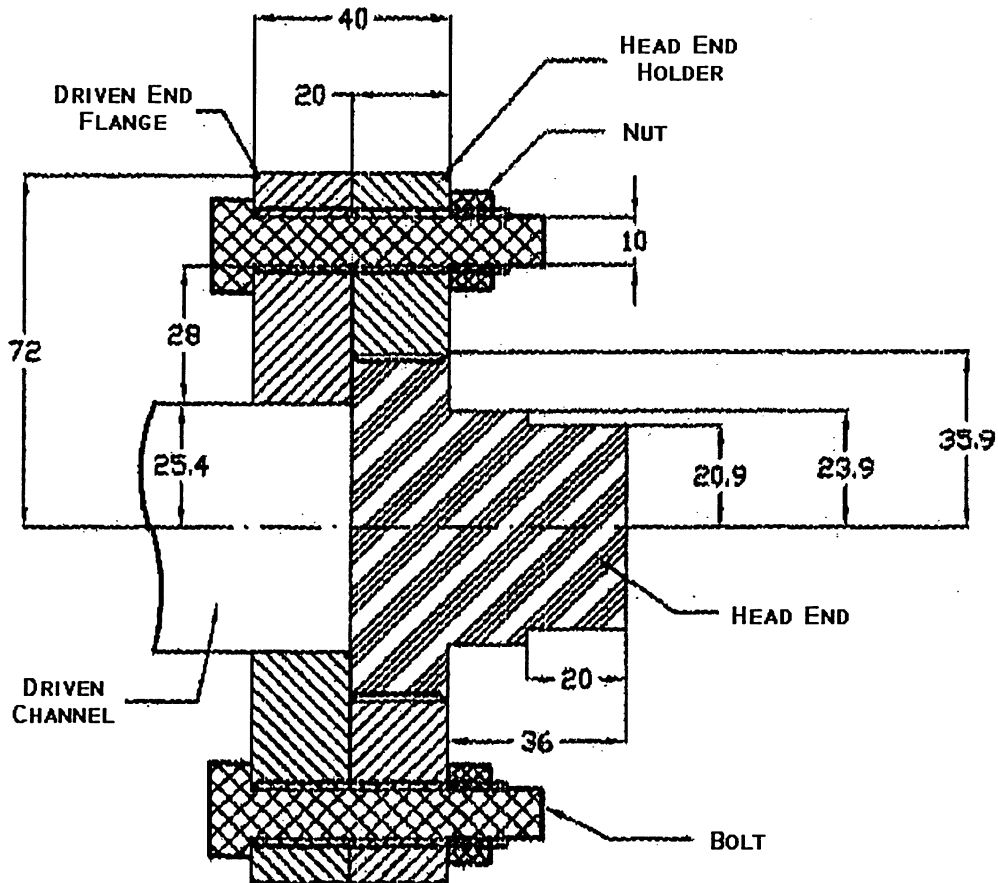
Driven – head end assembly (all dimensions in mm)
